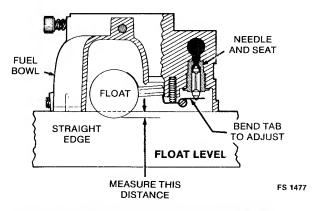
CARBURETOR TYPE B ADJUSTMENTS
